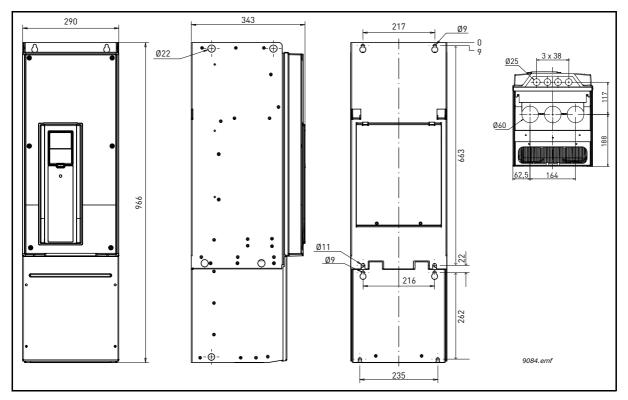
SmartDrive dimensions, MR8 IP21 and IP54
